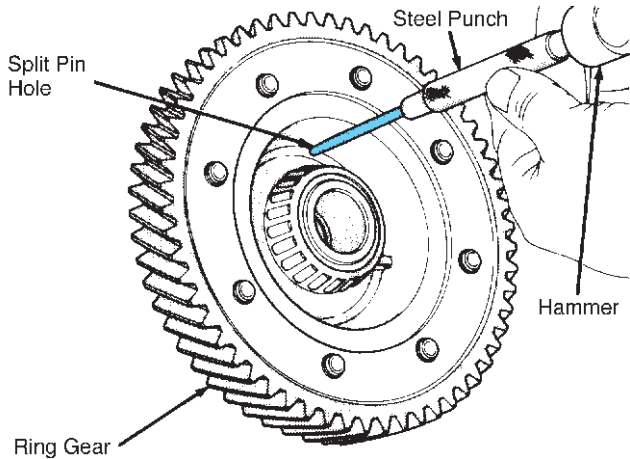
The first disassembly step for most differentials is to remove the pinion shaft lock pin or screw. (Courtesy of DaimlerChrysler Corporation)
